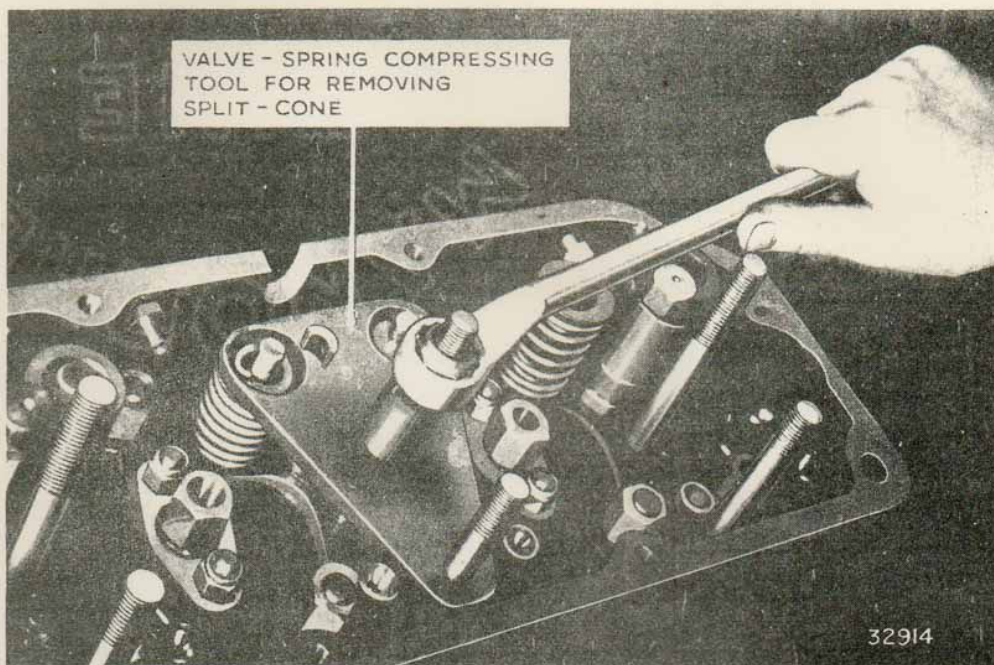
VALVE SPRING COMPRESSING TOOL.
